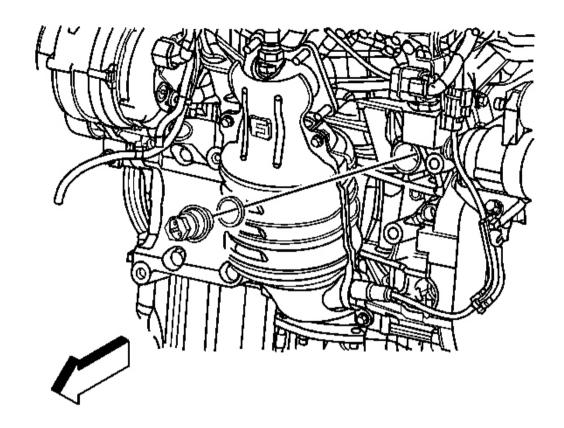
View Of Coolant Heater (L66) Courtesy of GENERAL MOTORS CORP.
